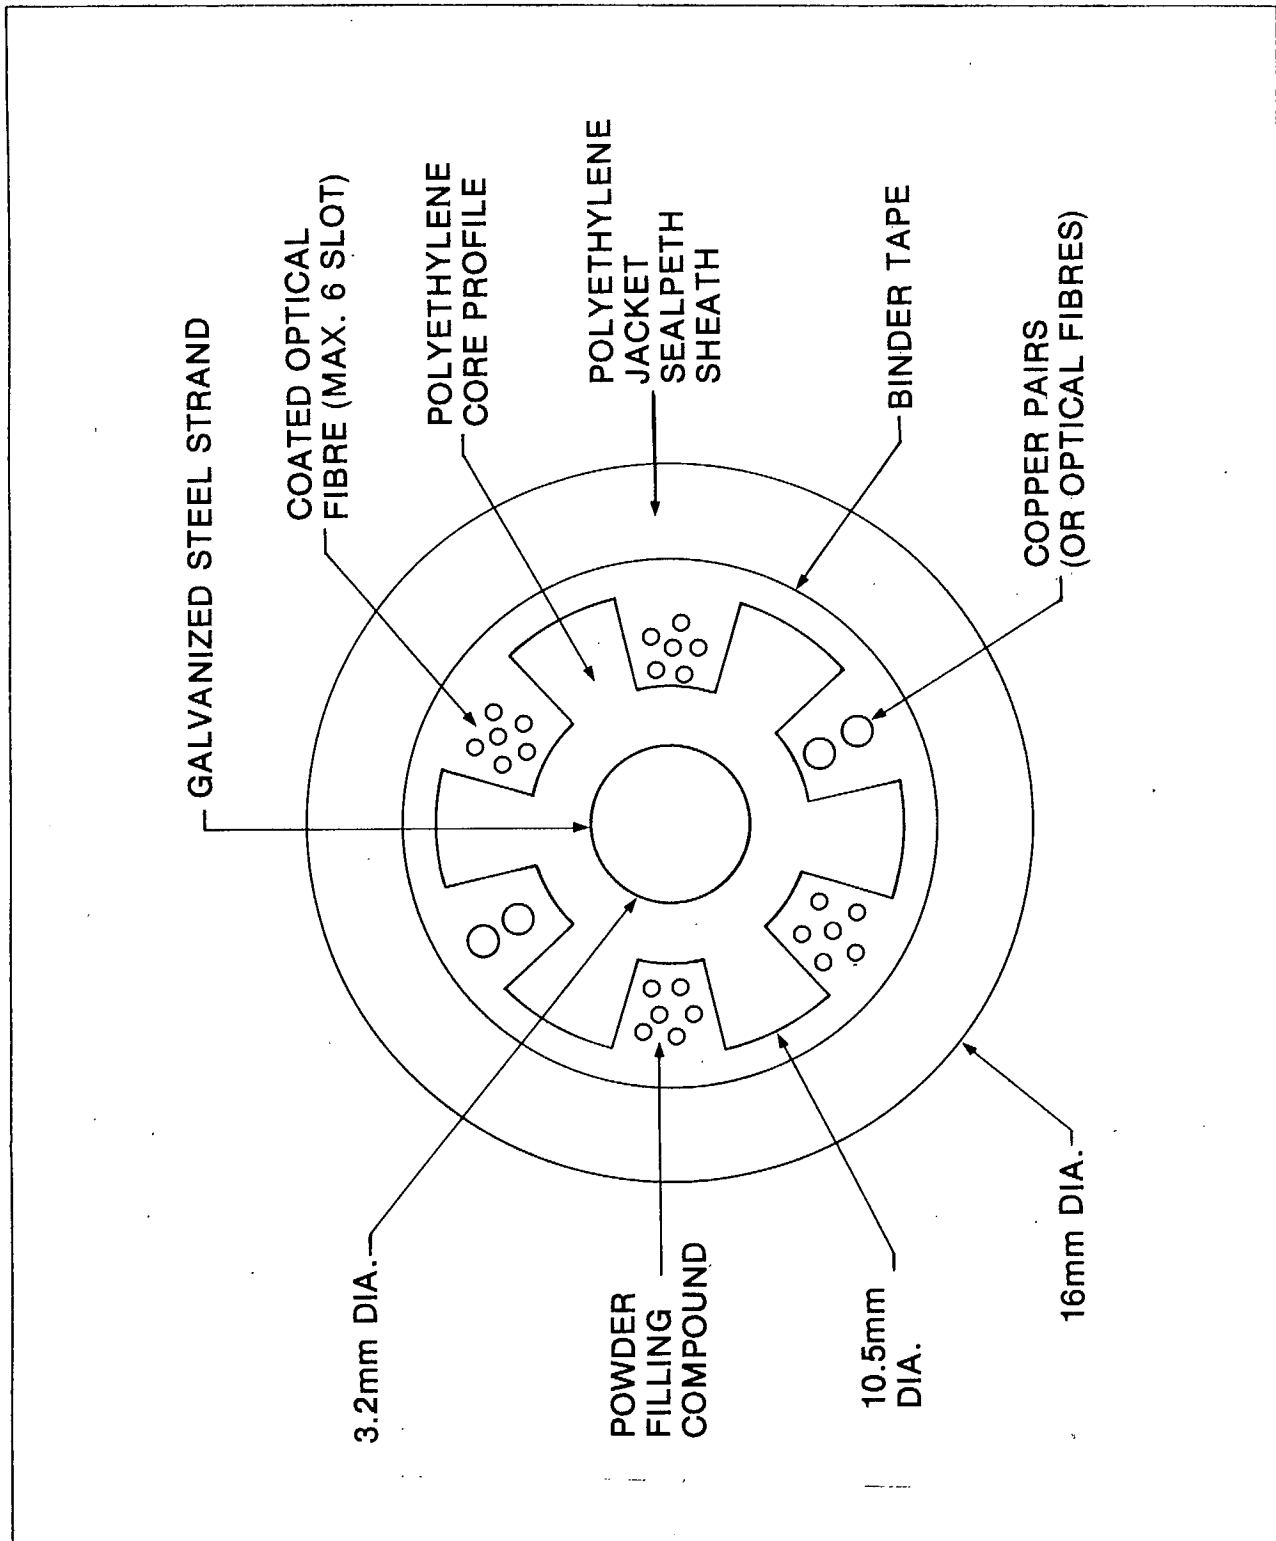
Cross section of the optical fibre cable used in the outside plant
